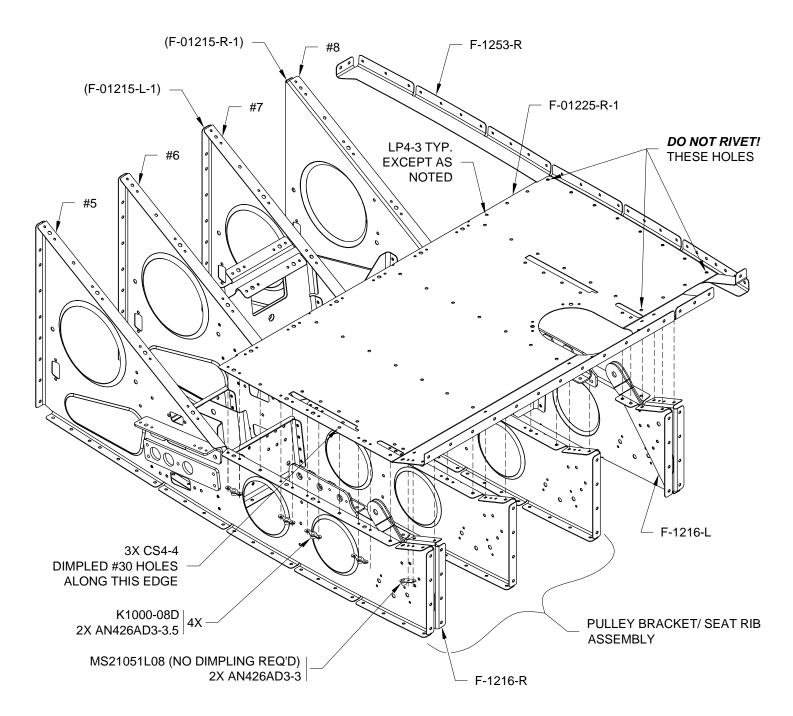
RIVETING RIGHT SEAT FLOOR
